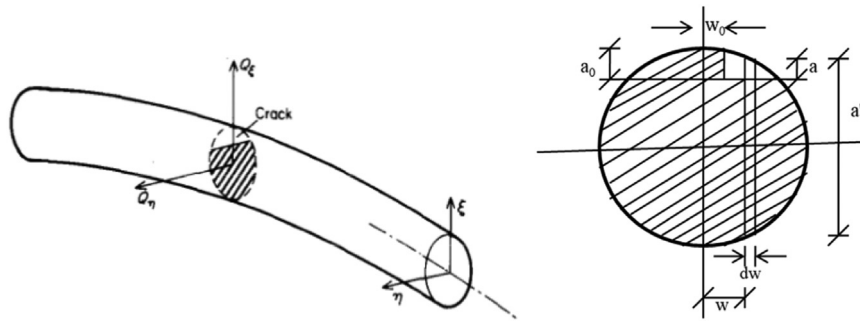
Geometrical coordinates and cross-section of a rotor shaft [89].
